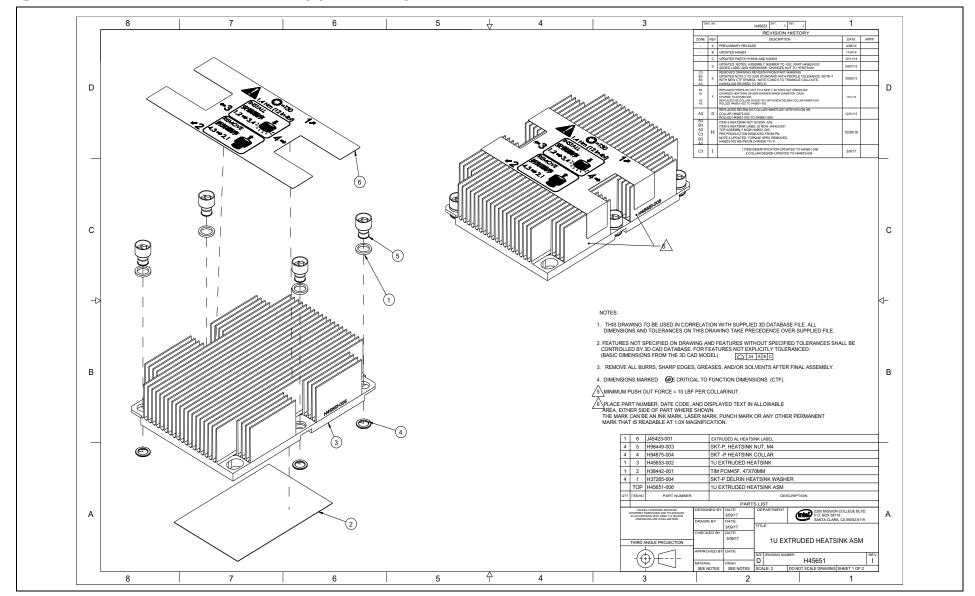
1U Extruded Heatsink Assembly (Sheet 2 of 2)
